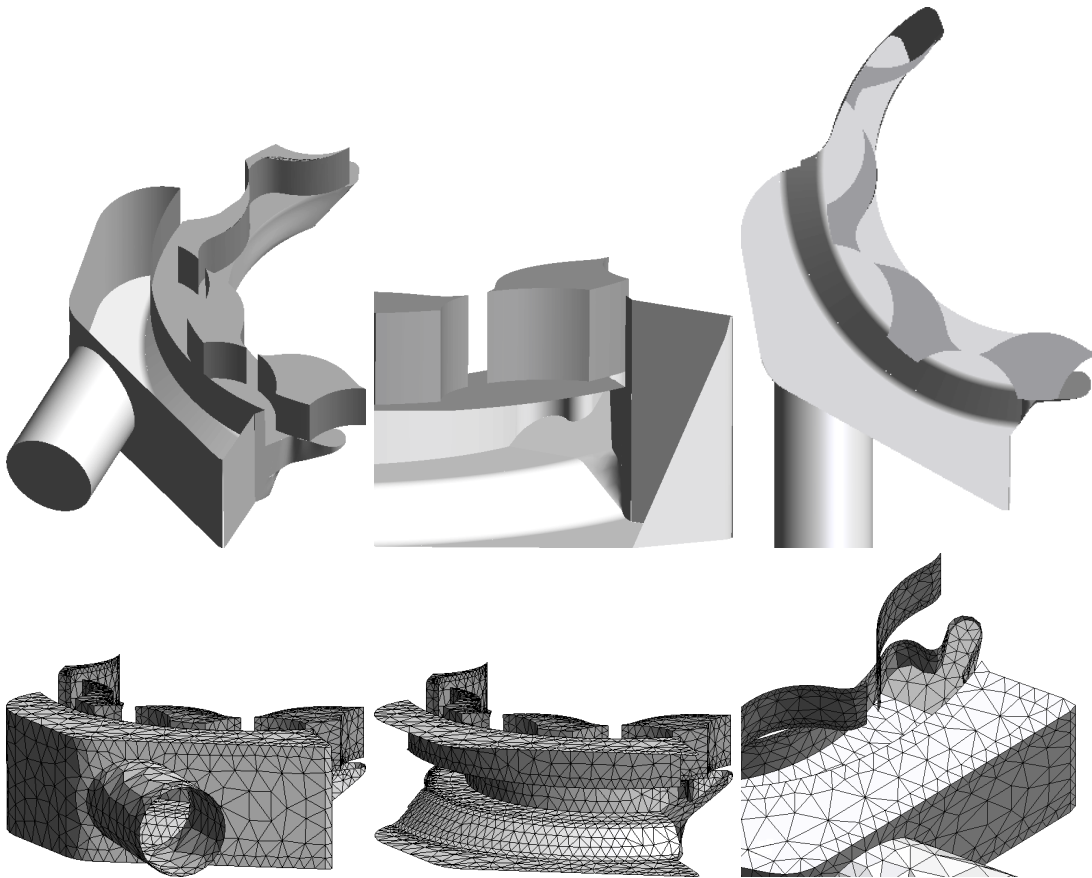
Internal gear pump. (Top) Geometry. (Bot.) Mesh.
